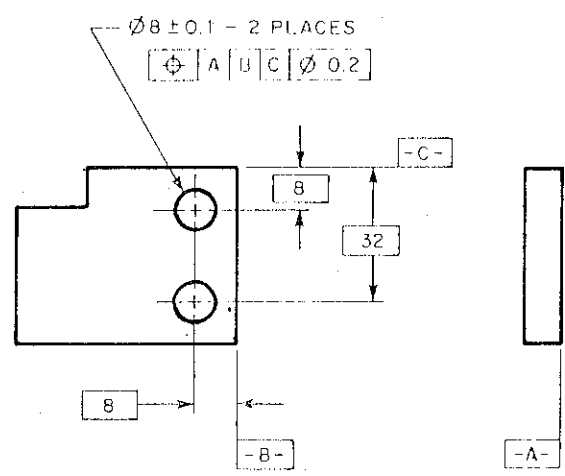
GEOMETRIC DIMENSIONING AND TOLERANCE EQUIVALENT OF FIGURE 1.
